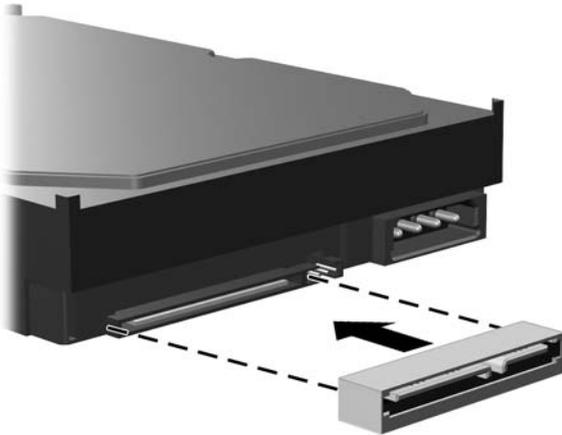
Attaching the SAS-to-SATA cable adapter
